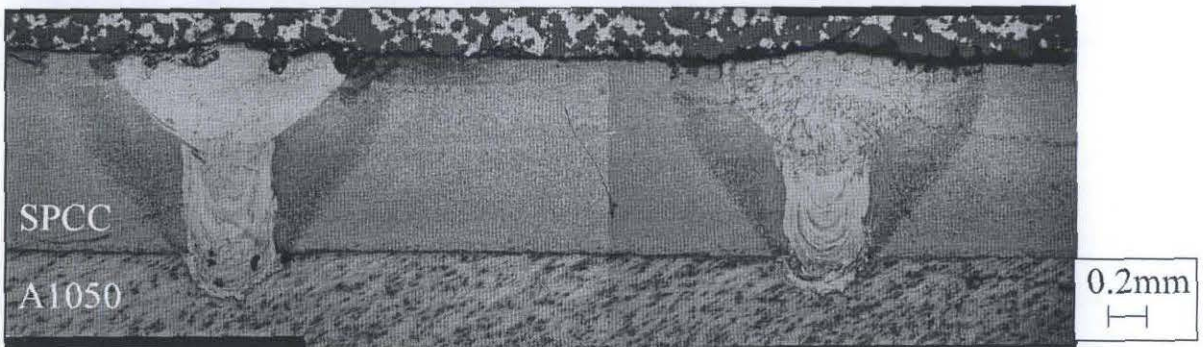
Macrostructures of the welds of SPCC/A1050.
